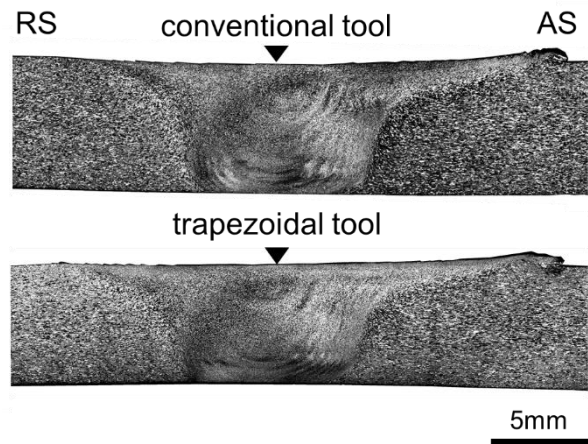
Macrostructures of welded joint. (1200rpm,7mm/s)
